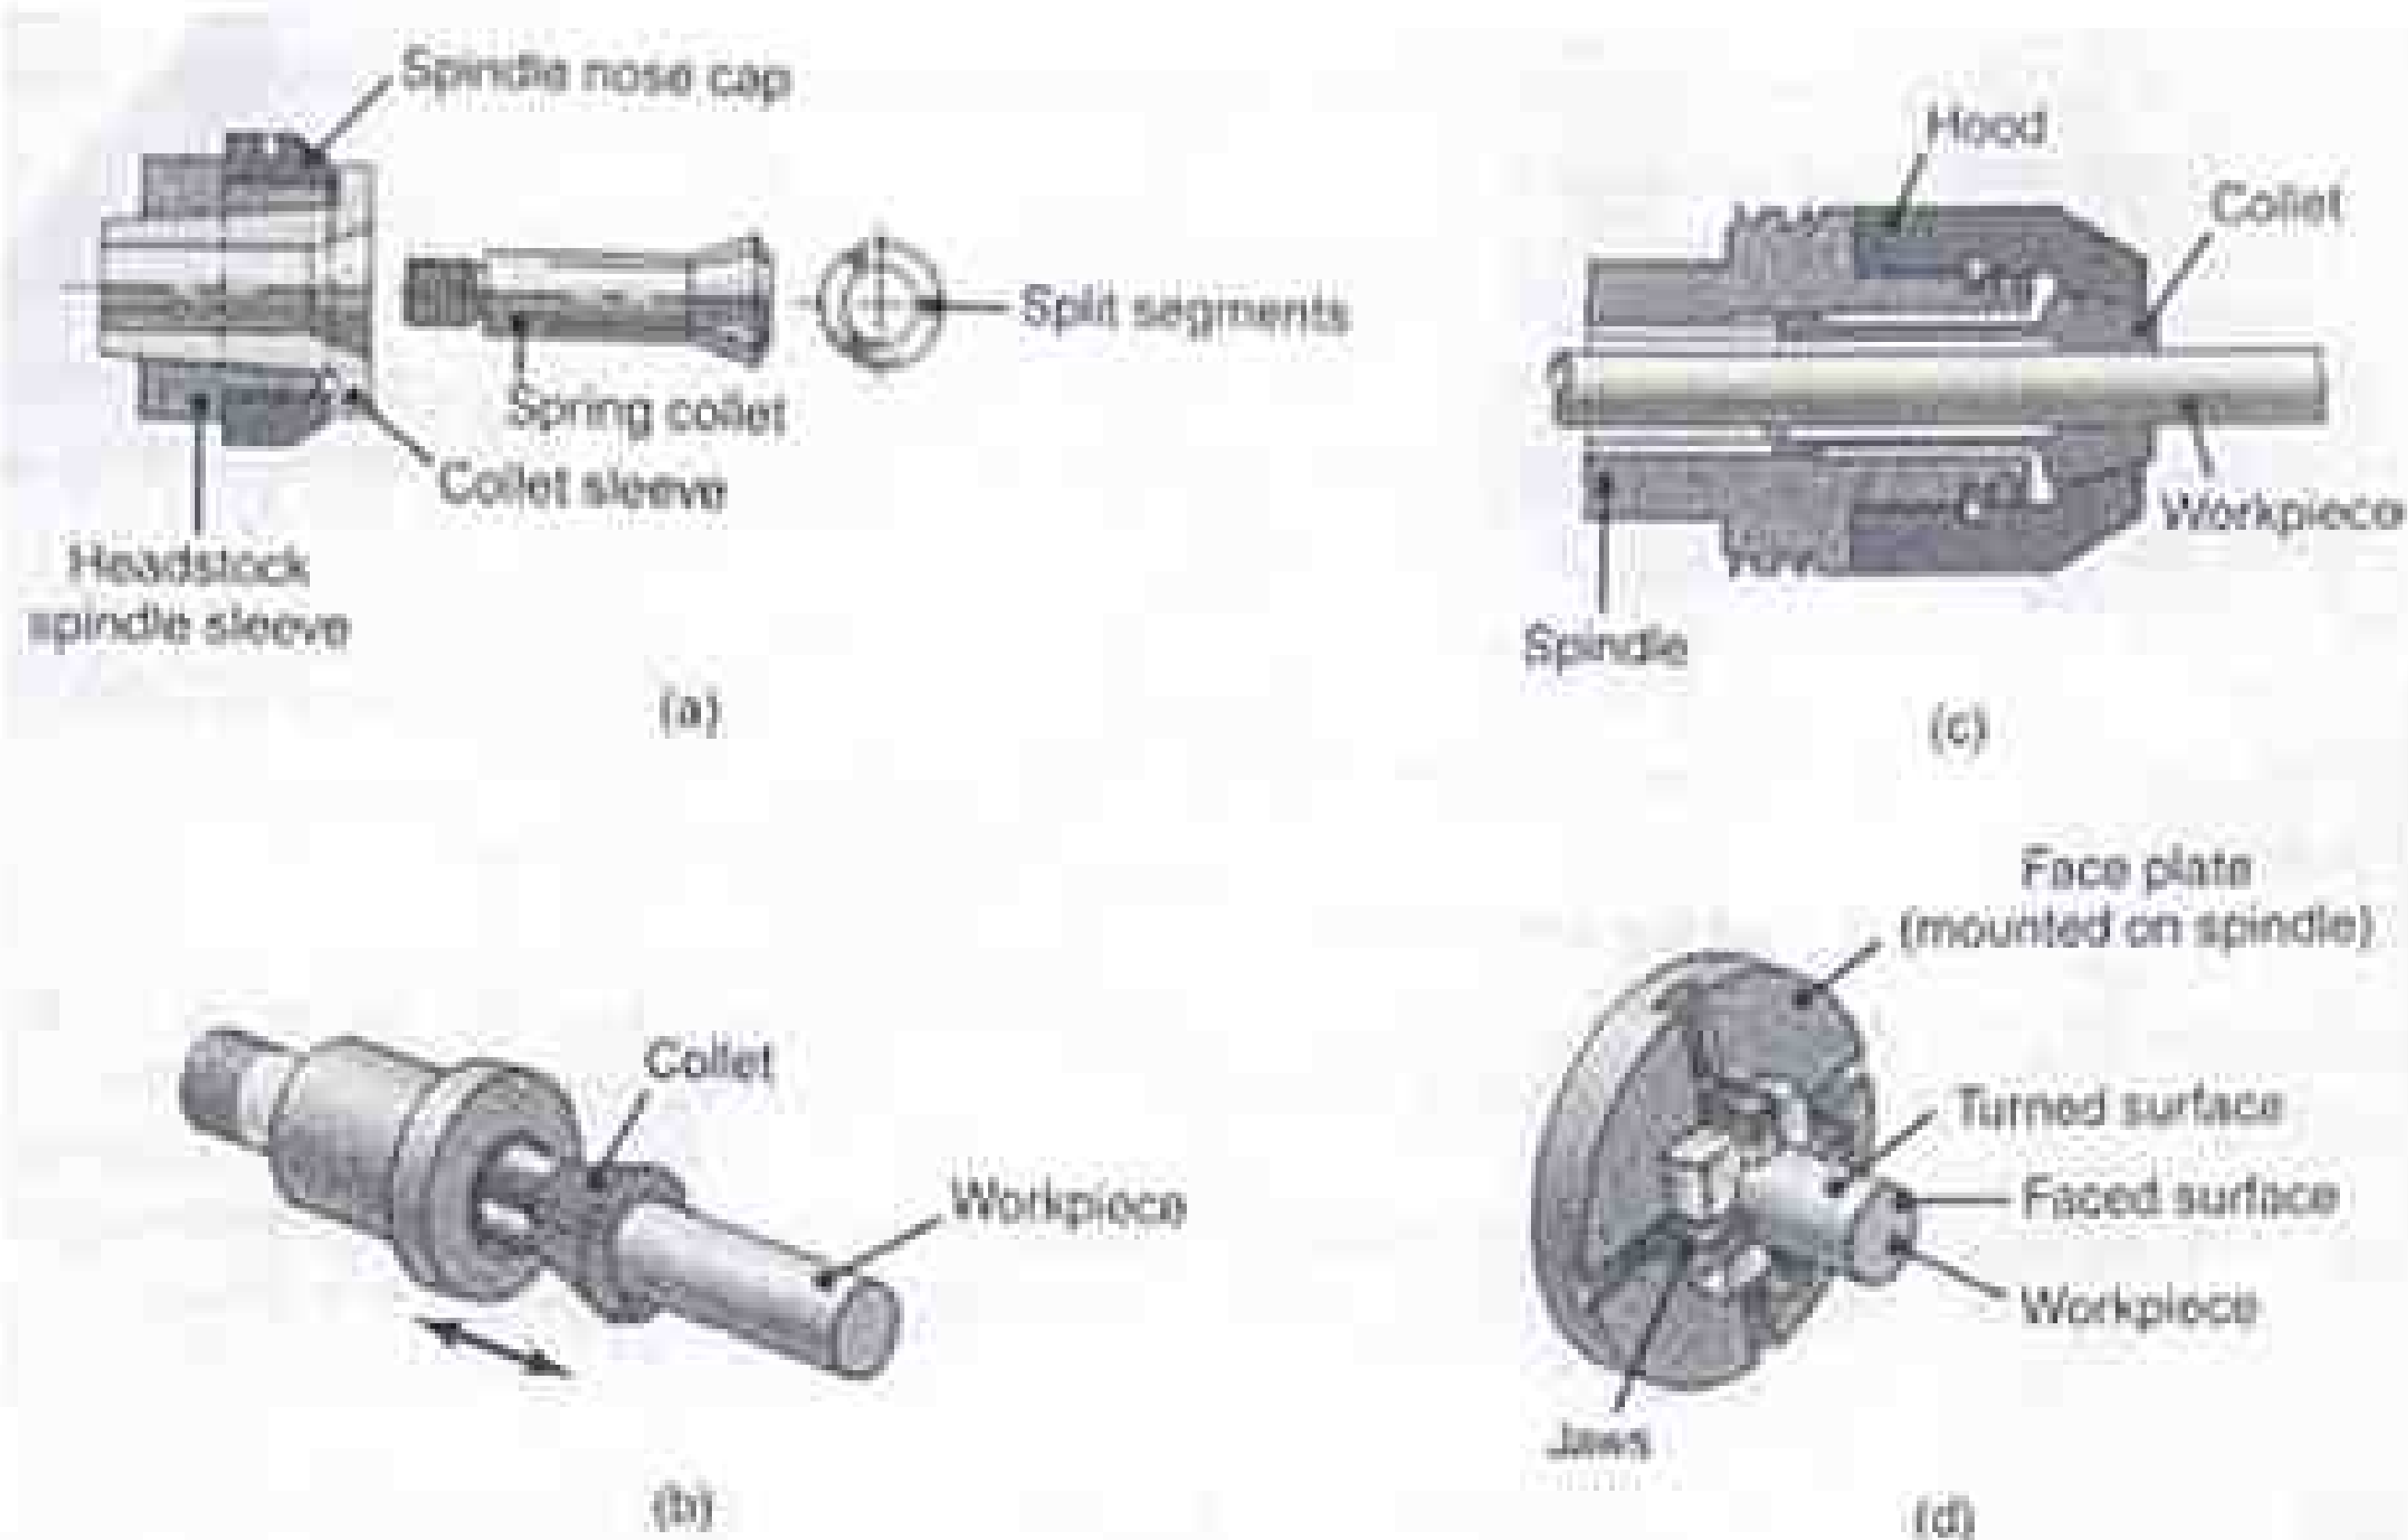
(a) and (b) Schematic illustrations of a draw-in type of collet. The workpiece is placed in the collet hole, and the conical surfaces of the collet are forced inward by pulling it with a draw bar into the sleeve. (c) A push-out type of collet. (d) Work holding of a workpiece on a face plate.
